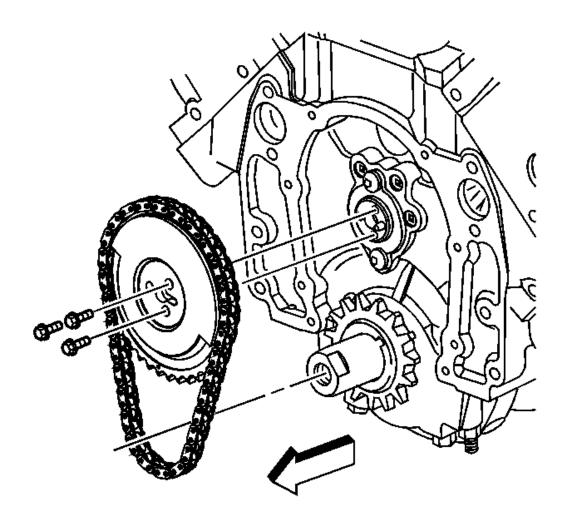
View Of Camshaft Sprocket, Timing Chain & Bolts Courtesy of GENERAL MOTORS CORP.
